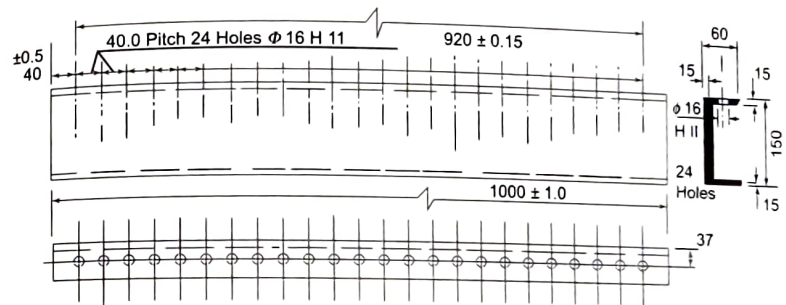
Spindle frame (workpiece) for indexing plate (Fig. 4.2c) and drill jig in Fig. 4.2d
